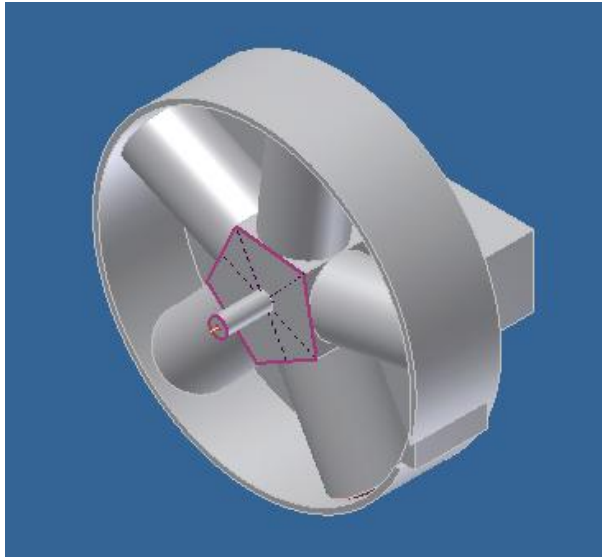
Fillings Dispenser with Motor Unit (In box)
